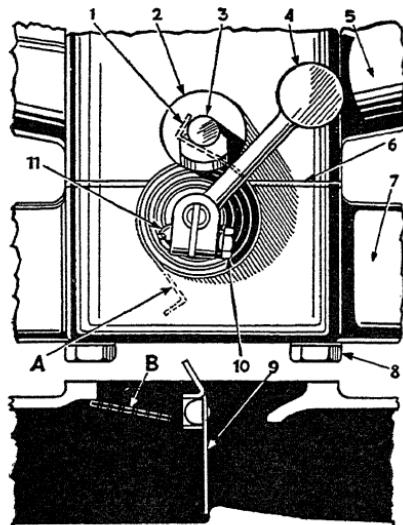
Automatic Manifold Heat Control Valve and Thermostat (DeLuxe, PE Model)
